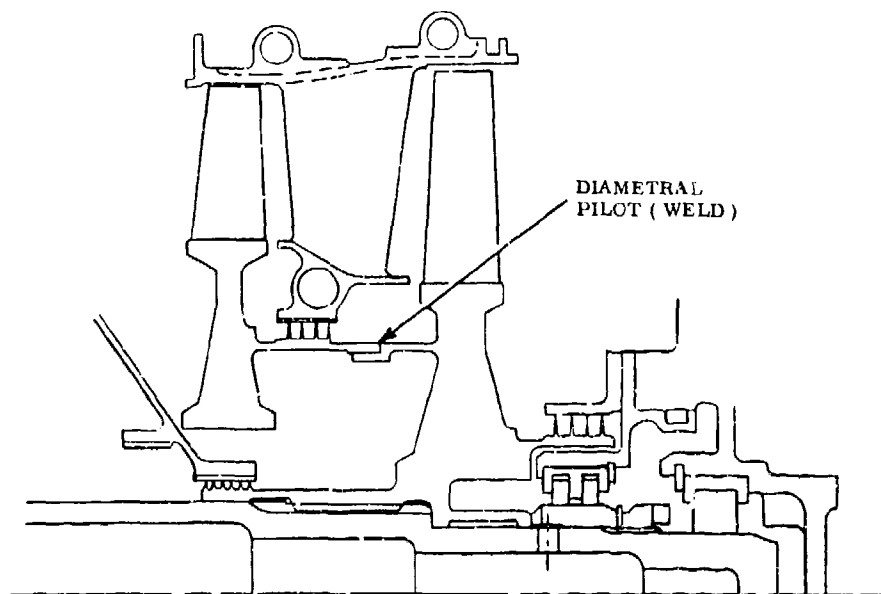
Welded LP Turbine Assembly.
